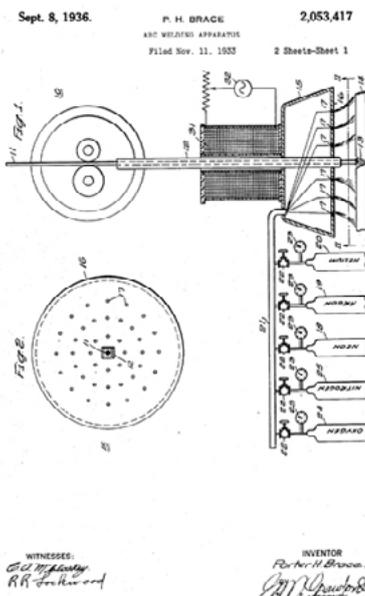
P. Brace: patent no. 2053417 "Arc welding apparatus": 8.08.1936 [3]
